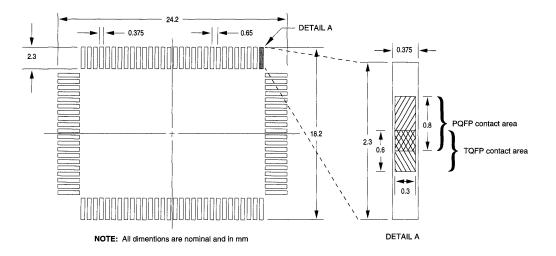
PCB LAND PATTERN FOR 100-PIN TQFP AND 100-PIN PQFP DEVICES
